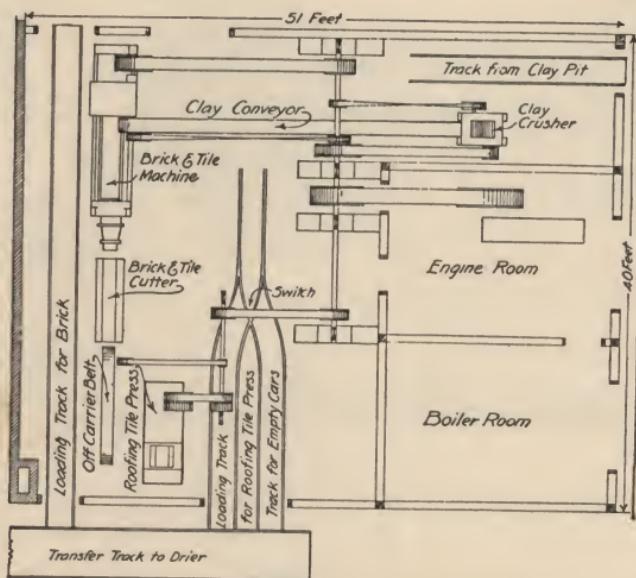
,797.—Stiff mud plant. The yard plan is the same as in fig. 3,790.
